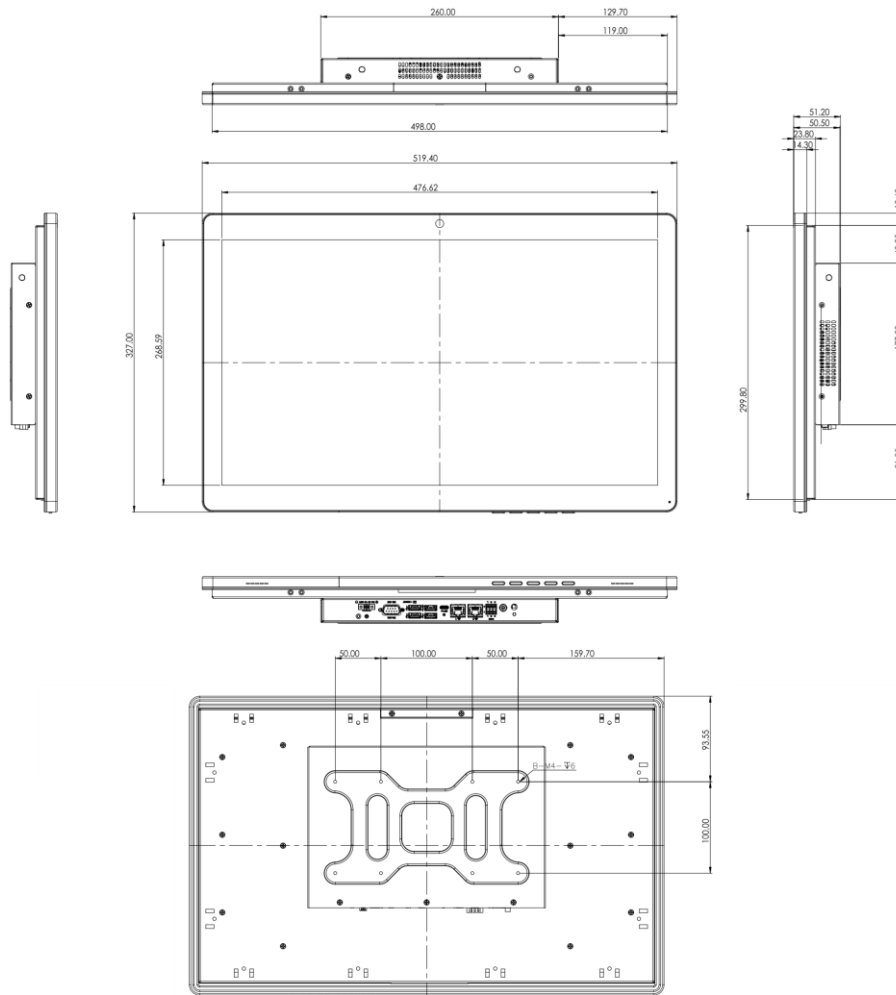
AURA-W1215-RK3576 Dimensions (mm)
